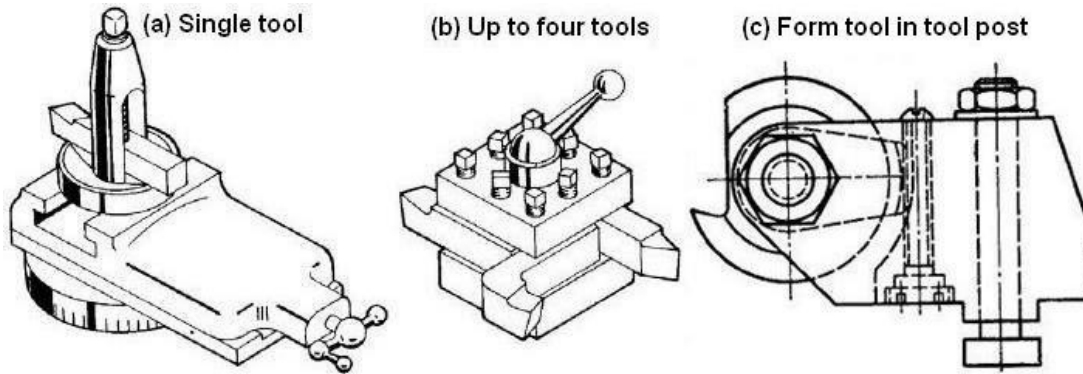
Mounting of (a and b) shank type tools in tool post and (c) form tool in tool post
